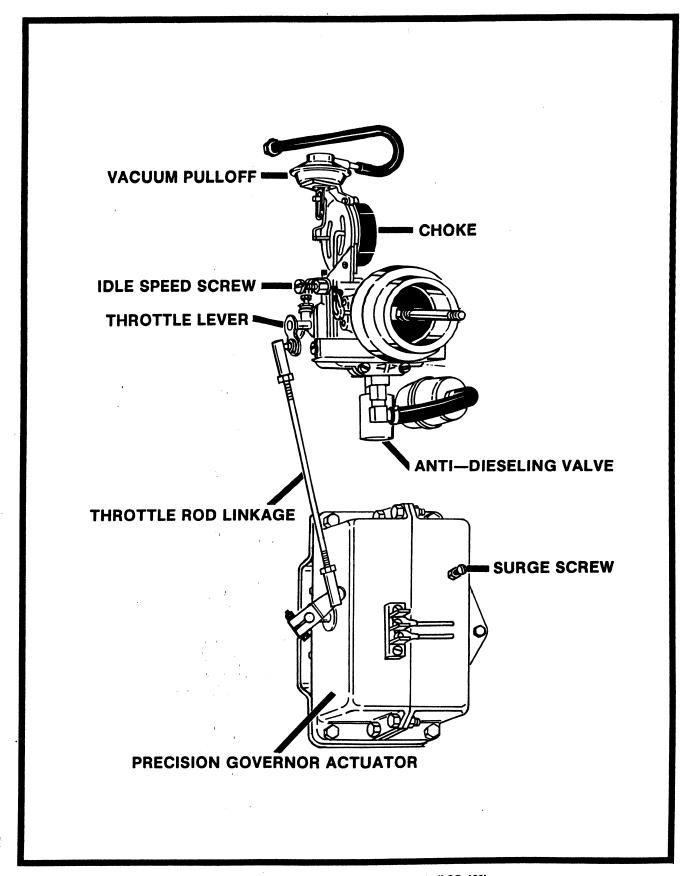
Throttle Checks and Adjustments (LSG-423).
